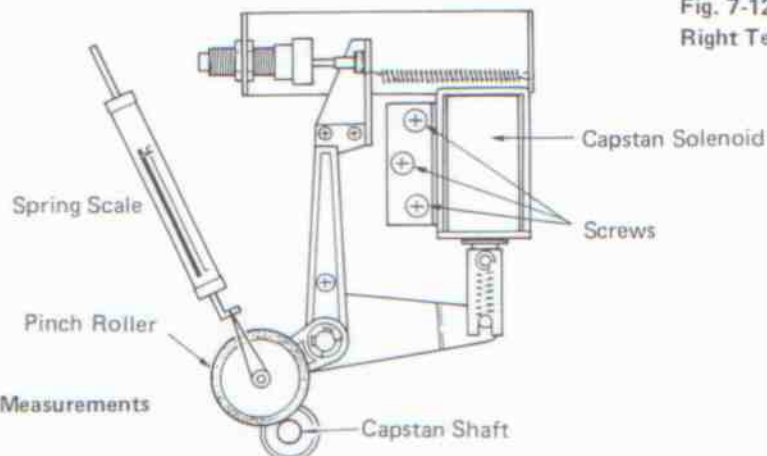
Pinch Roller Pressure Measurements and Adjustments.
